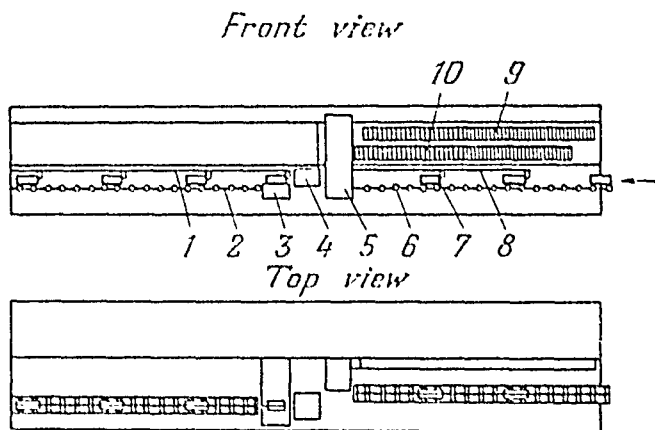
Block diagram of a horizontal surface broaching machine made by the Cincinnati Company (USA)
